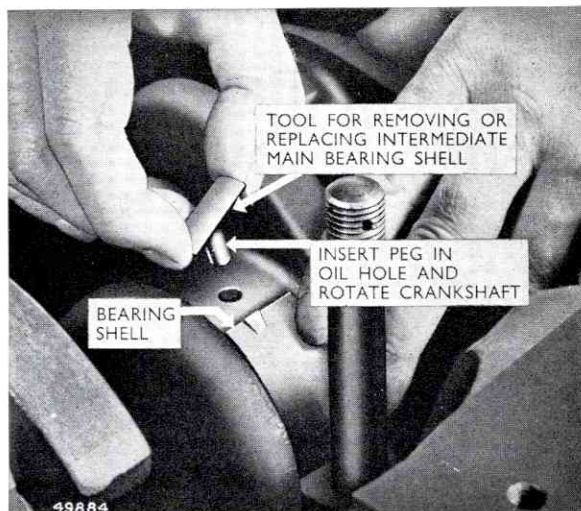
REMOVAL OF INTERMEDIATE BEARING SHELL
